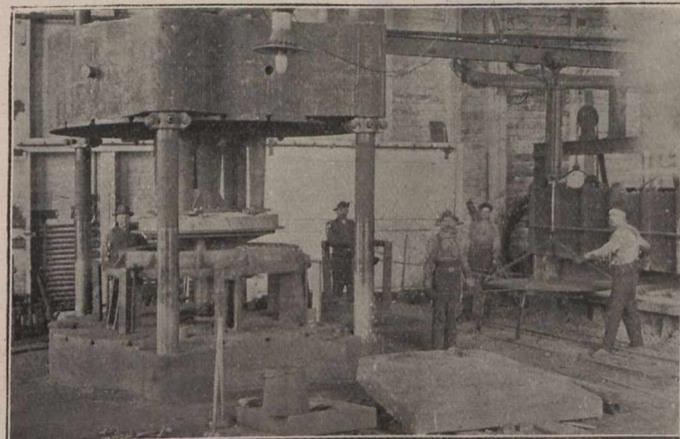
View of Boiler Shop, looking from Outer End towards the Assembling and Erecting Floors.
